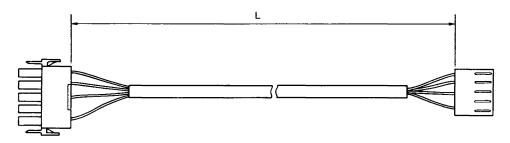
Cable B660-0625-T329A (Dual Channel PCB assy. — Power supply unit)
